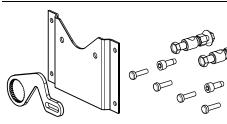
Rotary to Linear Crank Arm Kit with Mounting Bracket.
